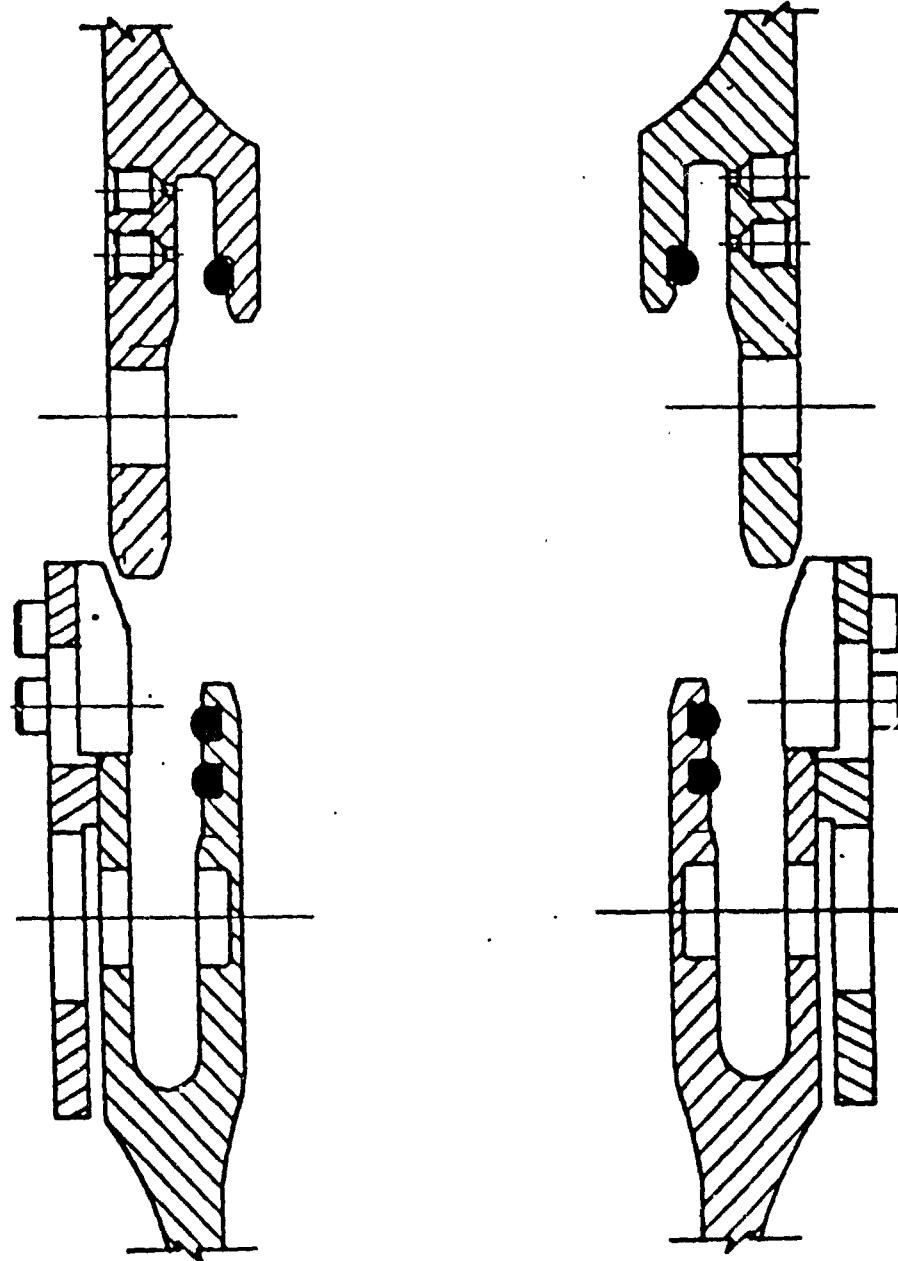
Tang Just Prior to FJAF Guide Block Engagement
